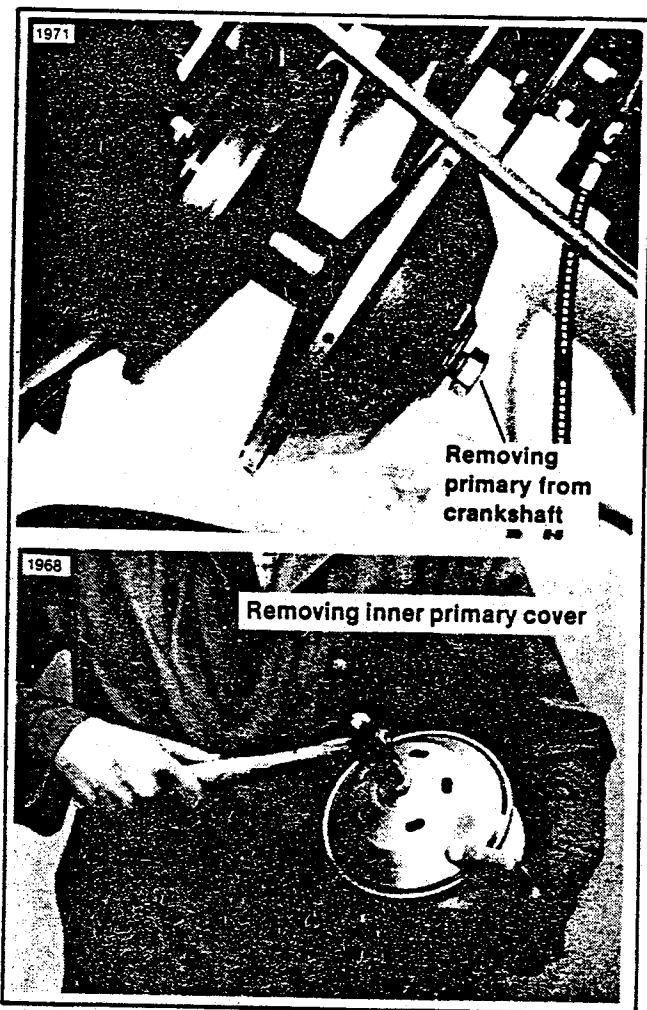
Removing Primary Drive Floating Flange and Drive Cover
